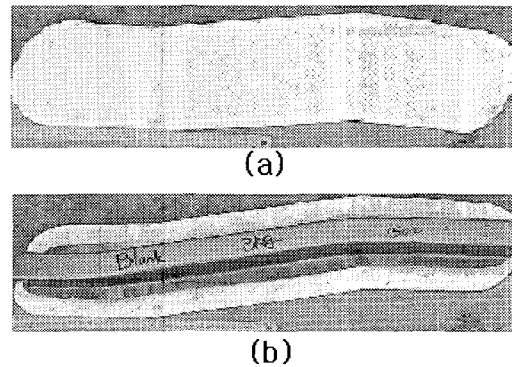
(a) Optimized initial blank and (b) draw panel formed with optimized initial blank
